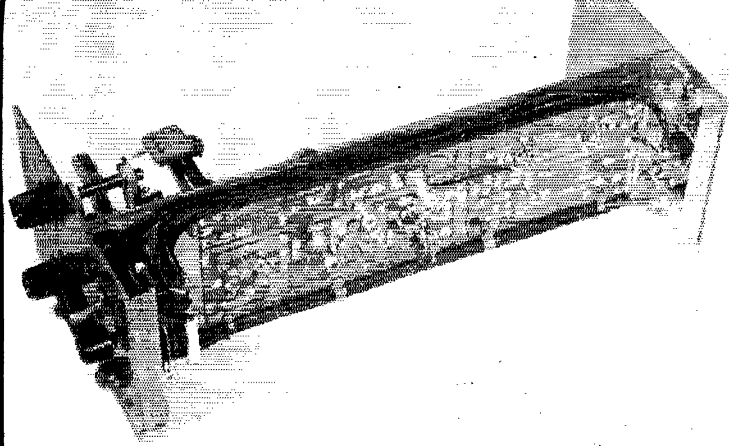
Bottom view of the mixer-converter unit showing placement of components and method of cabling the coaxial leads.
